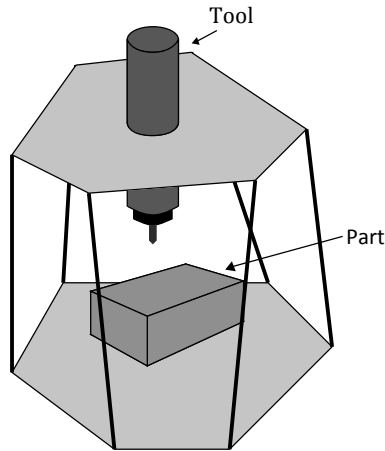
An illustration of the rapid prototyping system. A tool is attached to the top platform and moved in order to mill or print. In this example a milling tool is attached to the moving platform. A mechanism that can be used to keep the tool is not shown (and have not been studied in this thesis)
